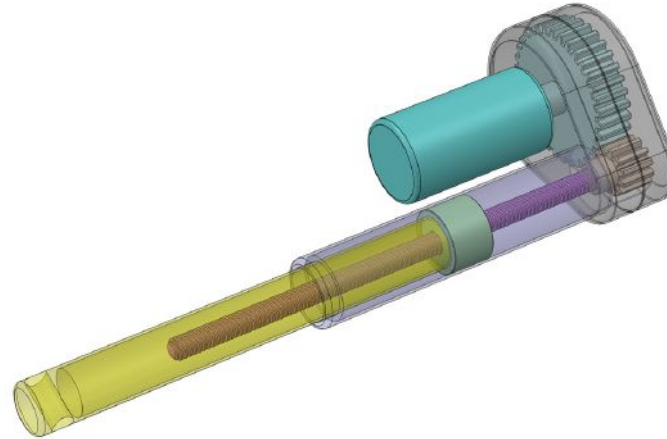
Linear Actuator Using Rotary Motor & Lead Screw
